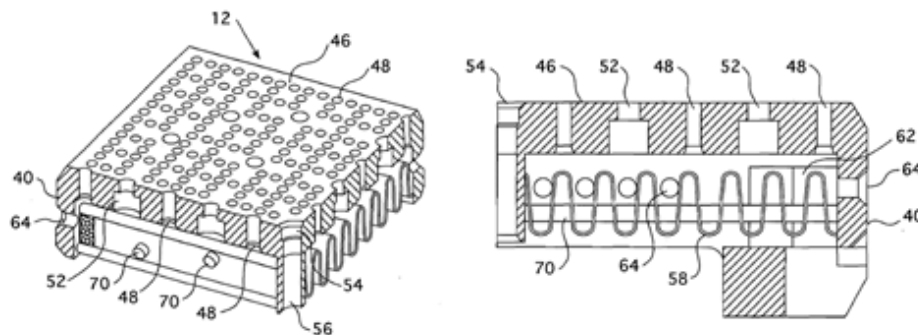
Patent Drawing of Assembly P-Grid and Debris Filter [13]
